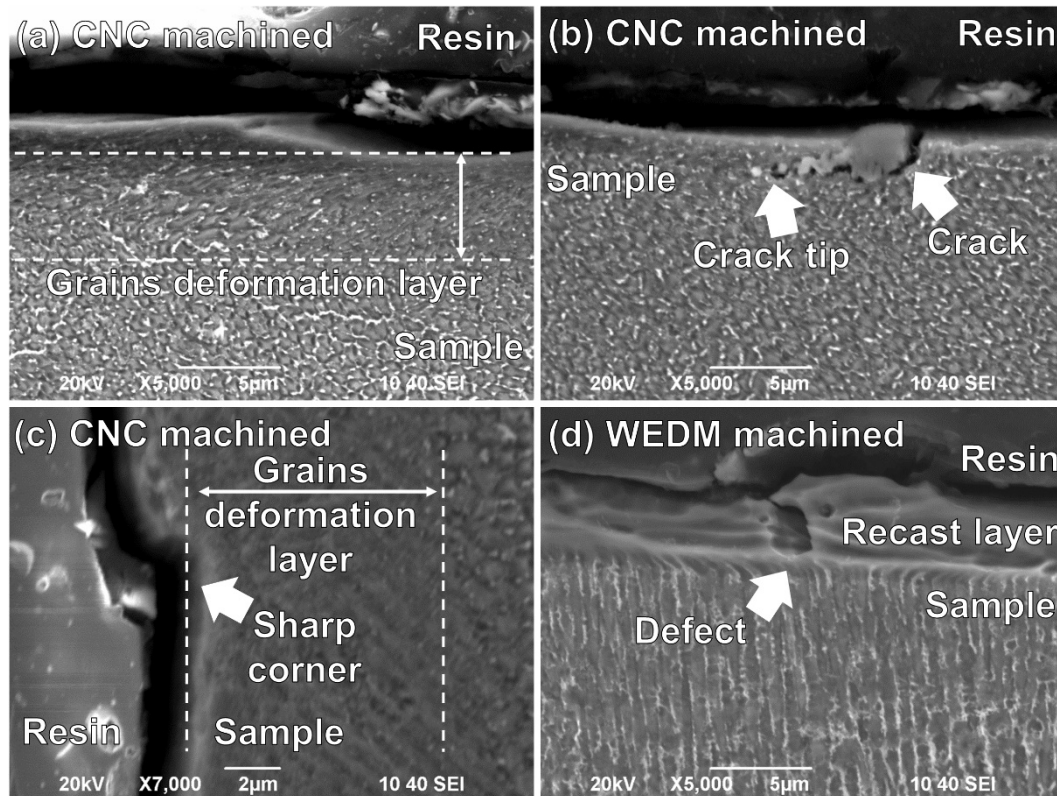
SEM photos of (a) deformed layer and (b) surface crack caused by CNC end milling, (c) deformed layer and defect generated in CNC side milling, and (d) recast layer in Wire EDM cutting.
